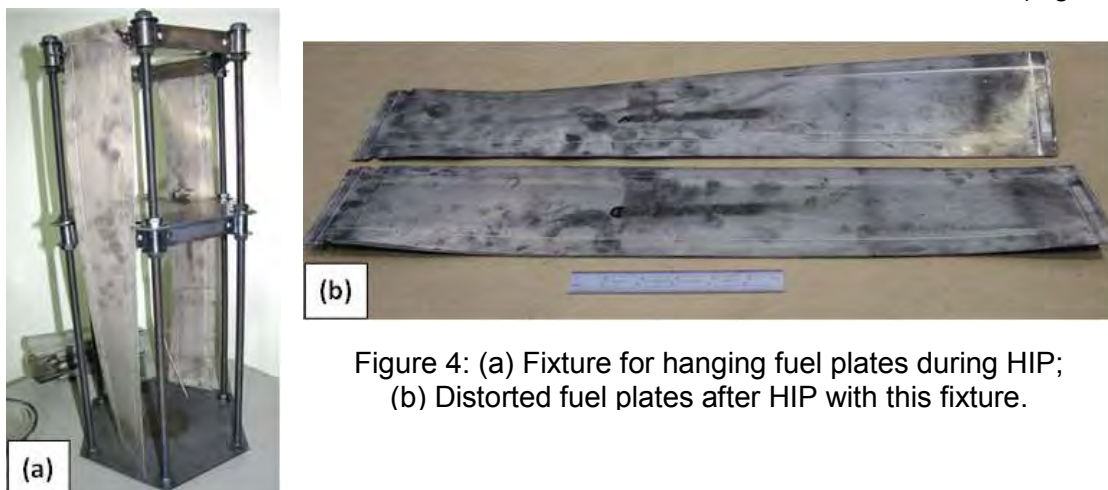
(a) Fixture for hanging fuel plates during HIP; (b) Distorted fuel plates after HIP with this fixture.
